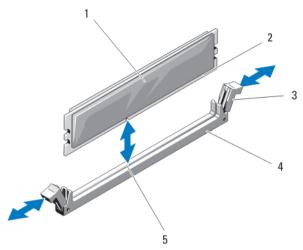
Removing and Installing a Memory Module or Memory Module Blank
